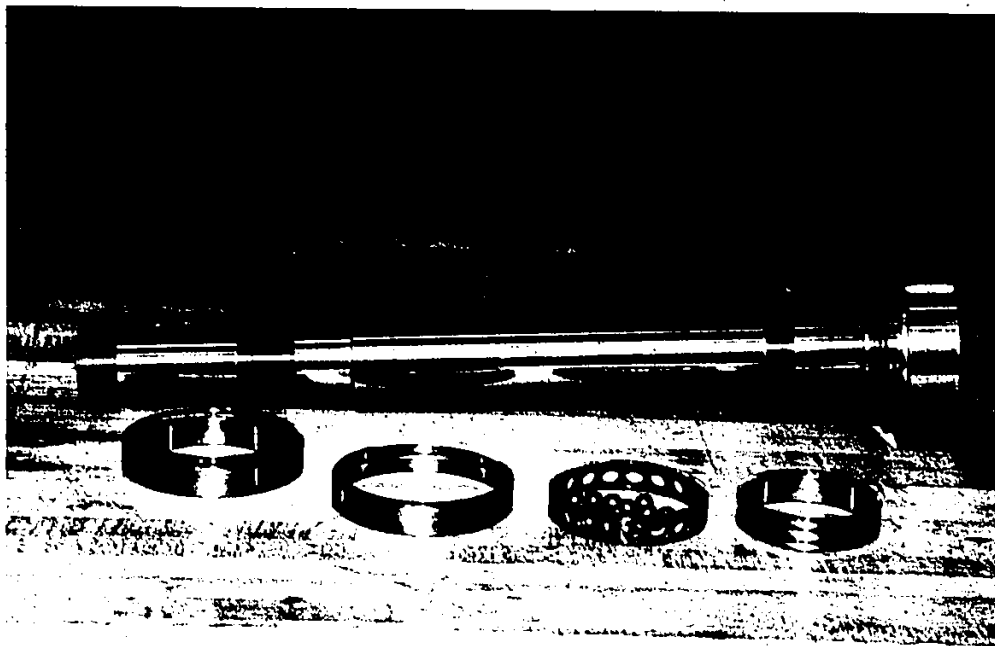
THE SHAFT AND BEARING ASSEMBLY
